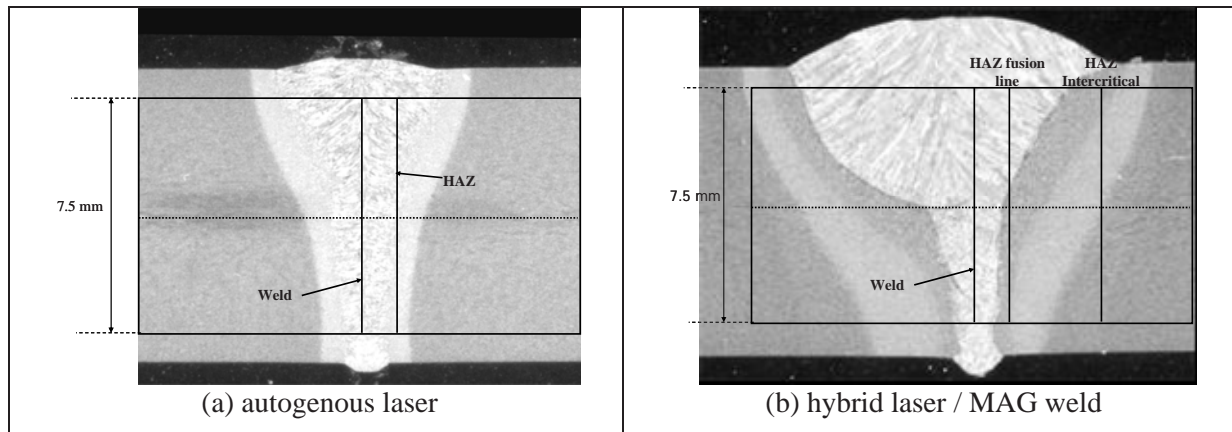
Notch locations in Charpy specimens for 9 mm thick laser welds
